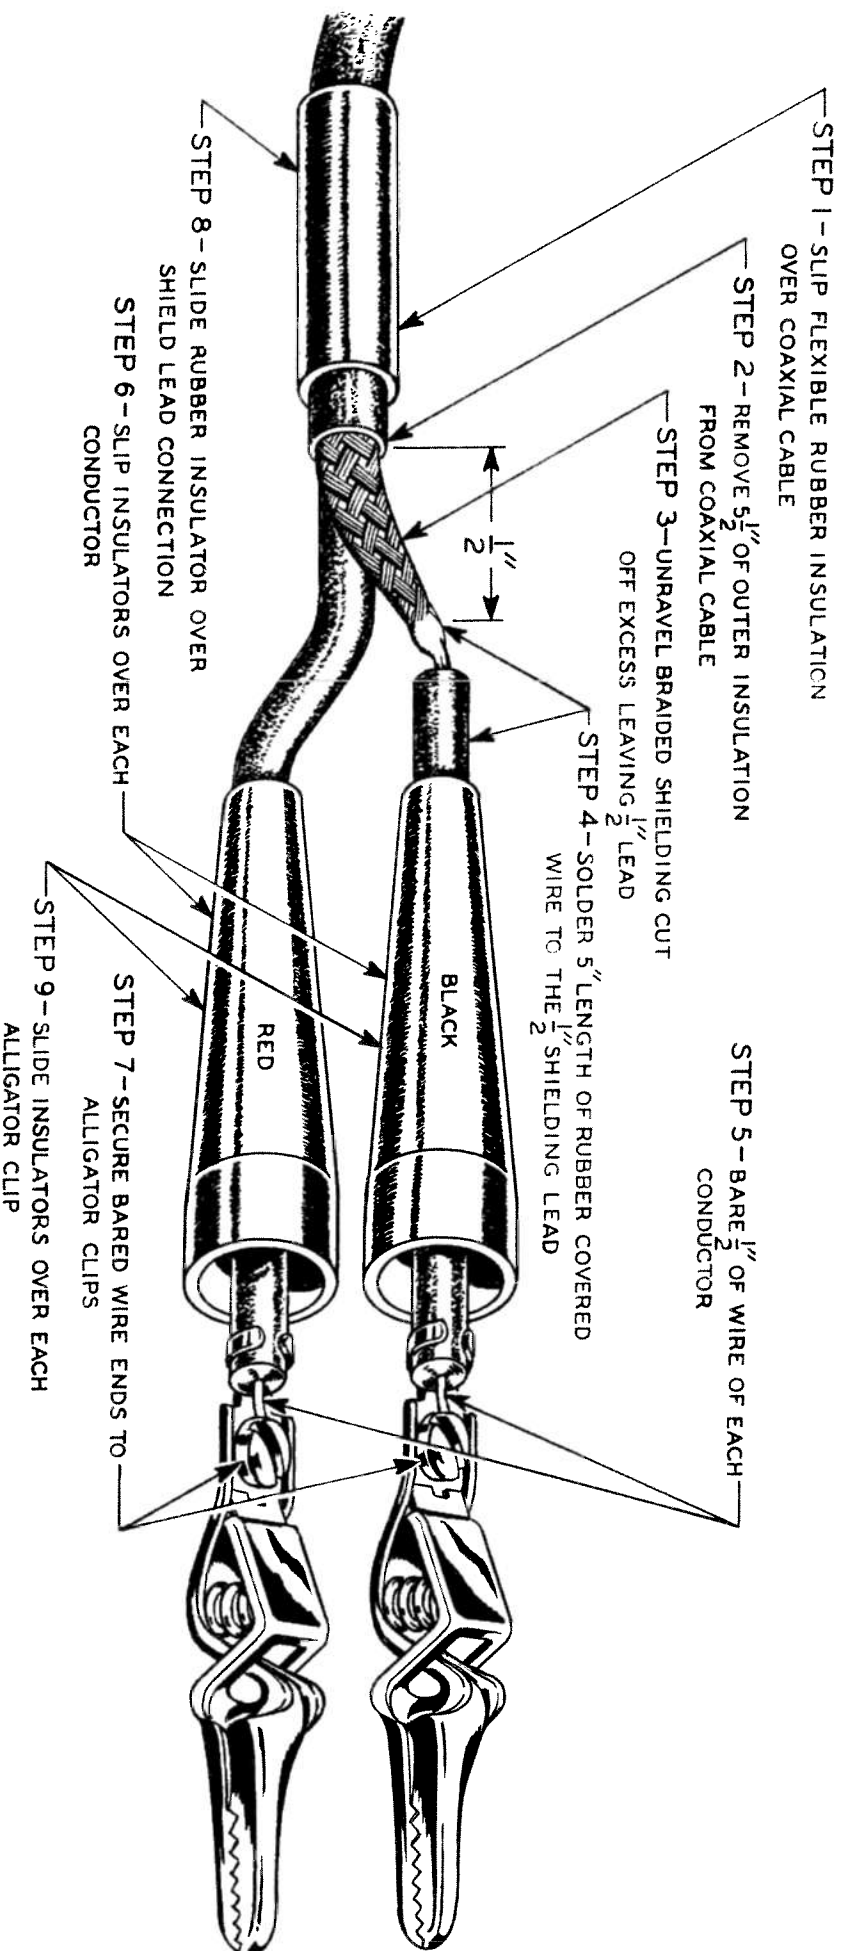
A, B HOW TO ASSEMBLE THE CABLE.
